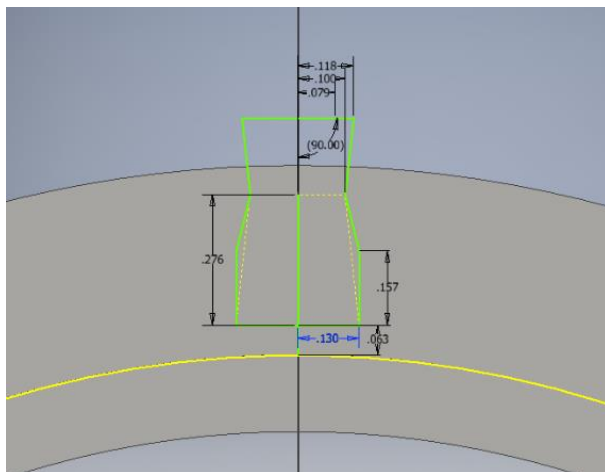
Profile of CAD model extrusion of sanding machine replacement part
